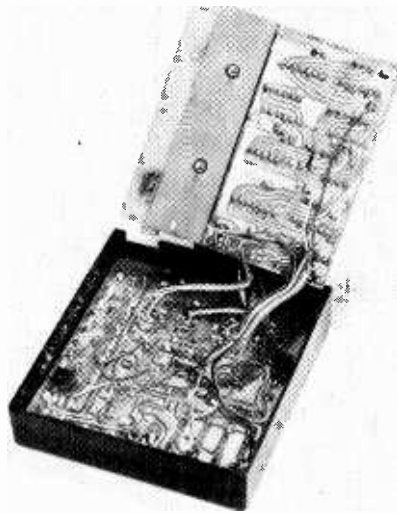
Internal view of the timer with p.c.b.2 hinged open. Board 2 is supported on board 1 by three Perspex blocks.
